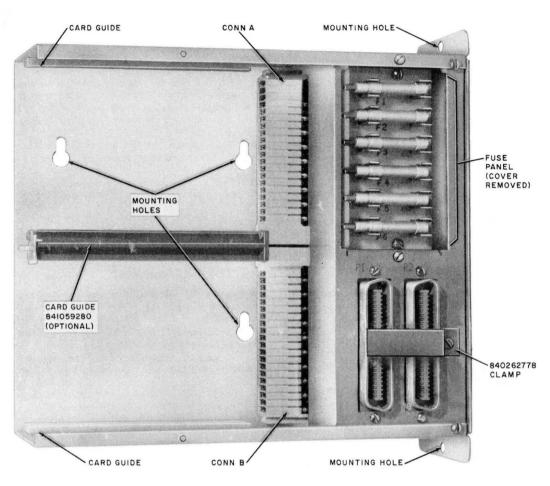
110A Apparatus Mounting (With Card Guide, Cover Removed)
